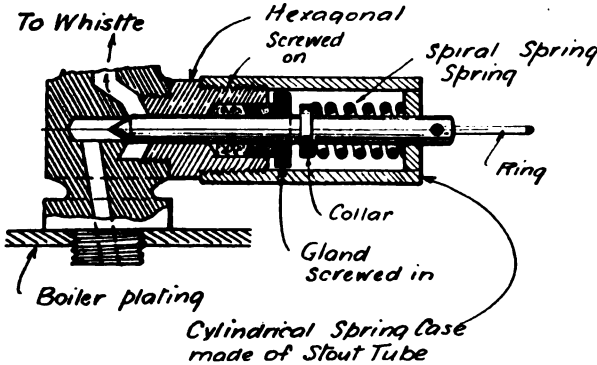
"PULL-OUT" VALVE FOR SMALL WHISTLES WITH PACKED STEM.
